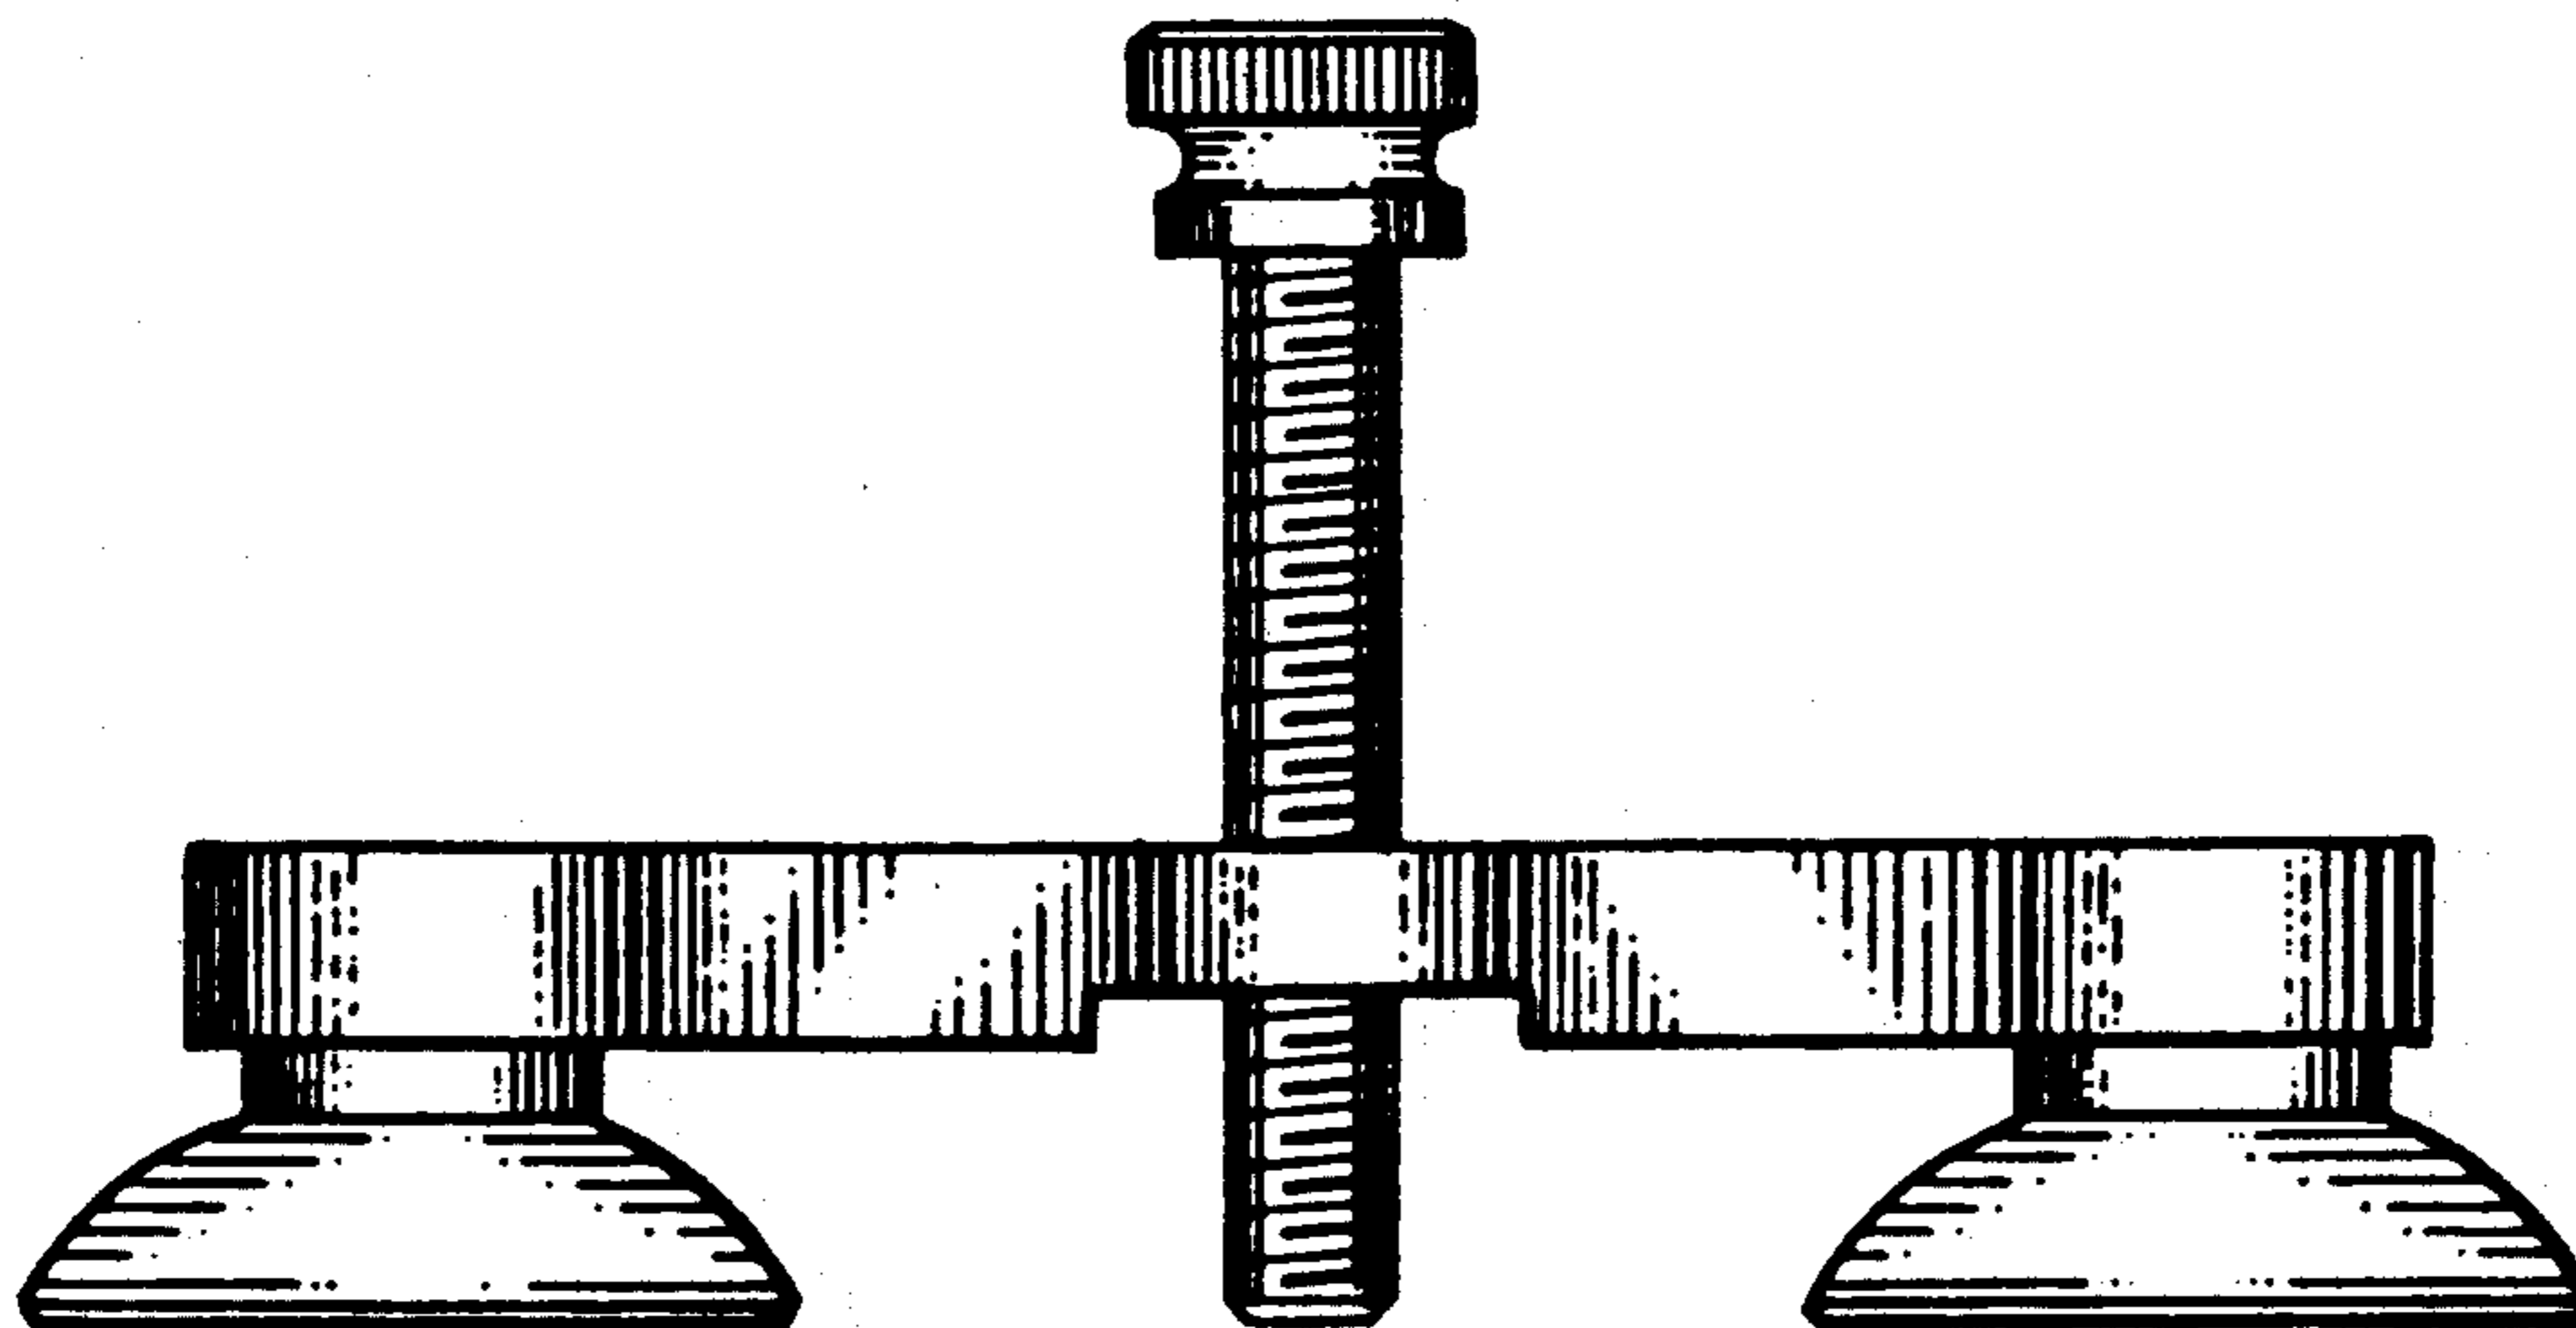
is a top plan view of a glass crack repair tool, showing my new design;
